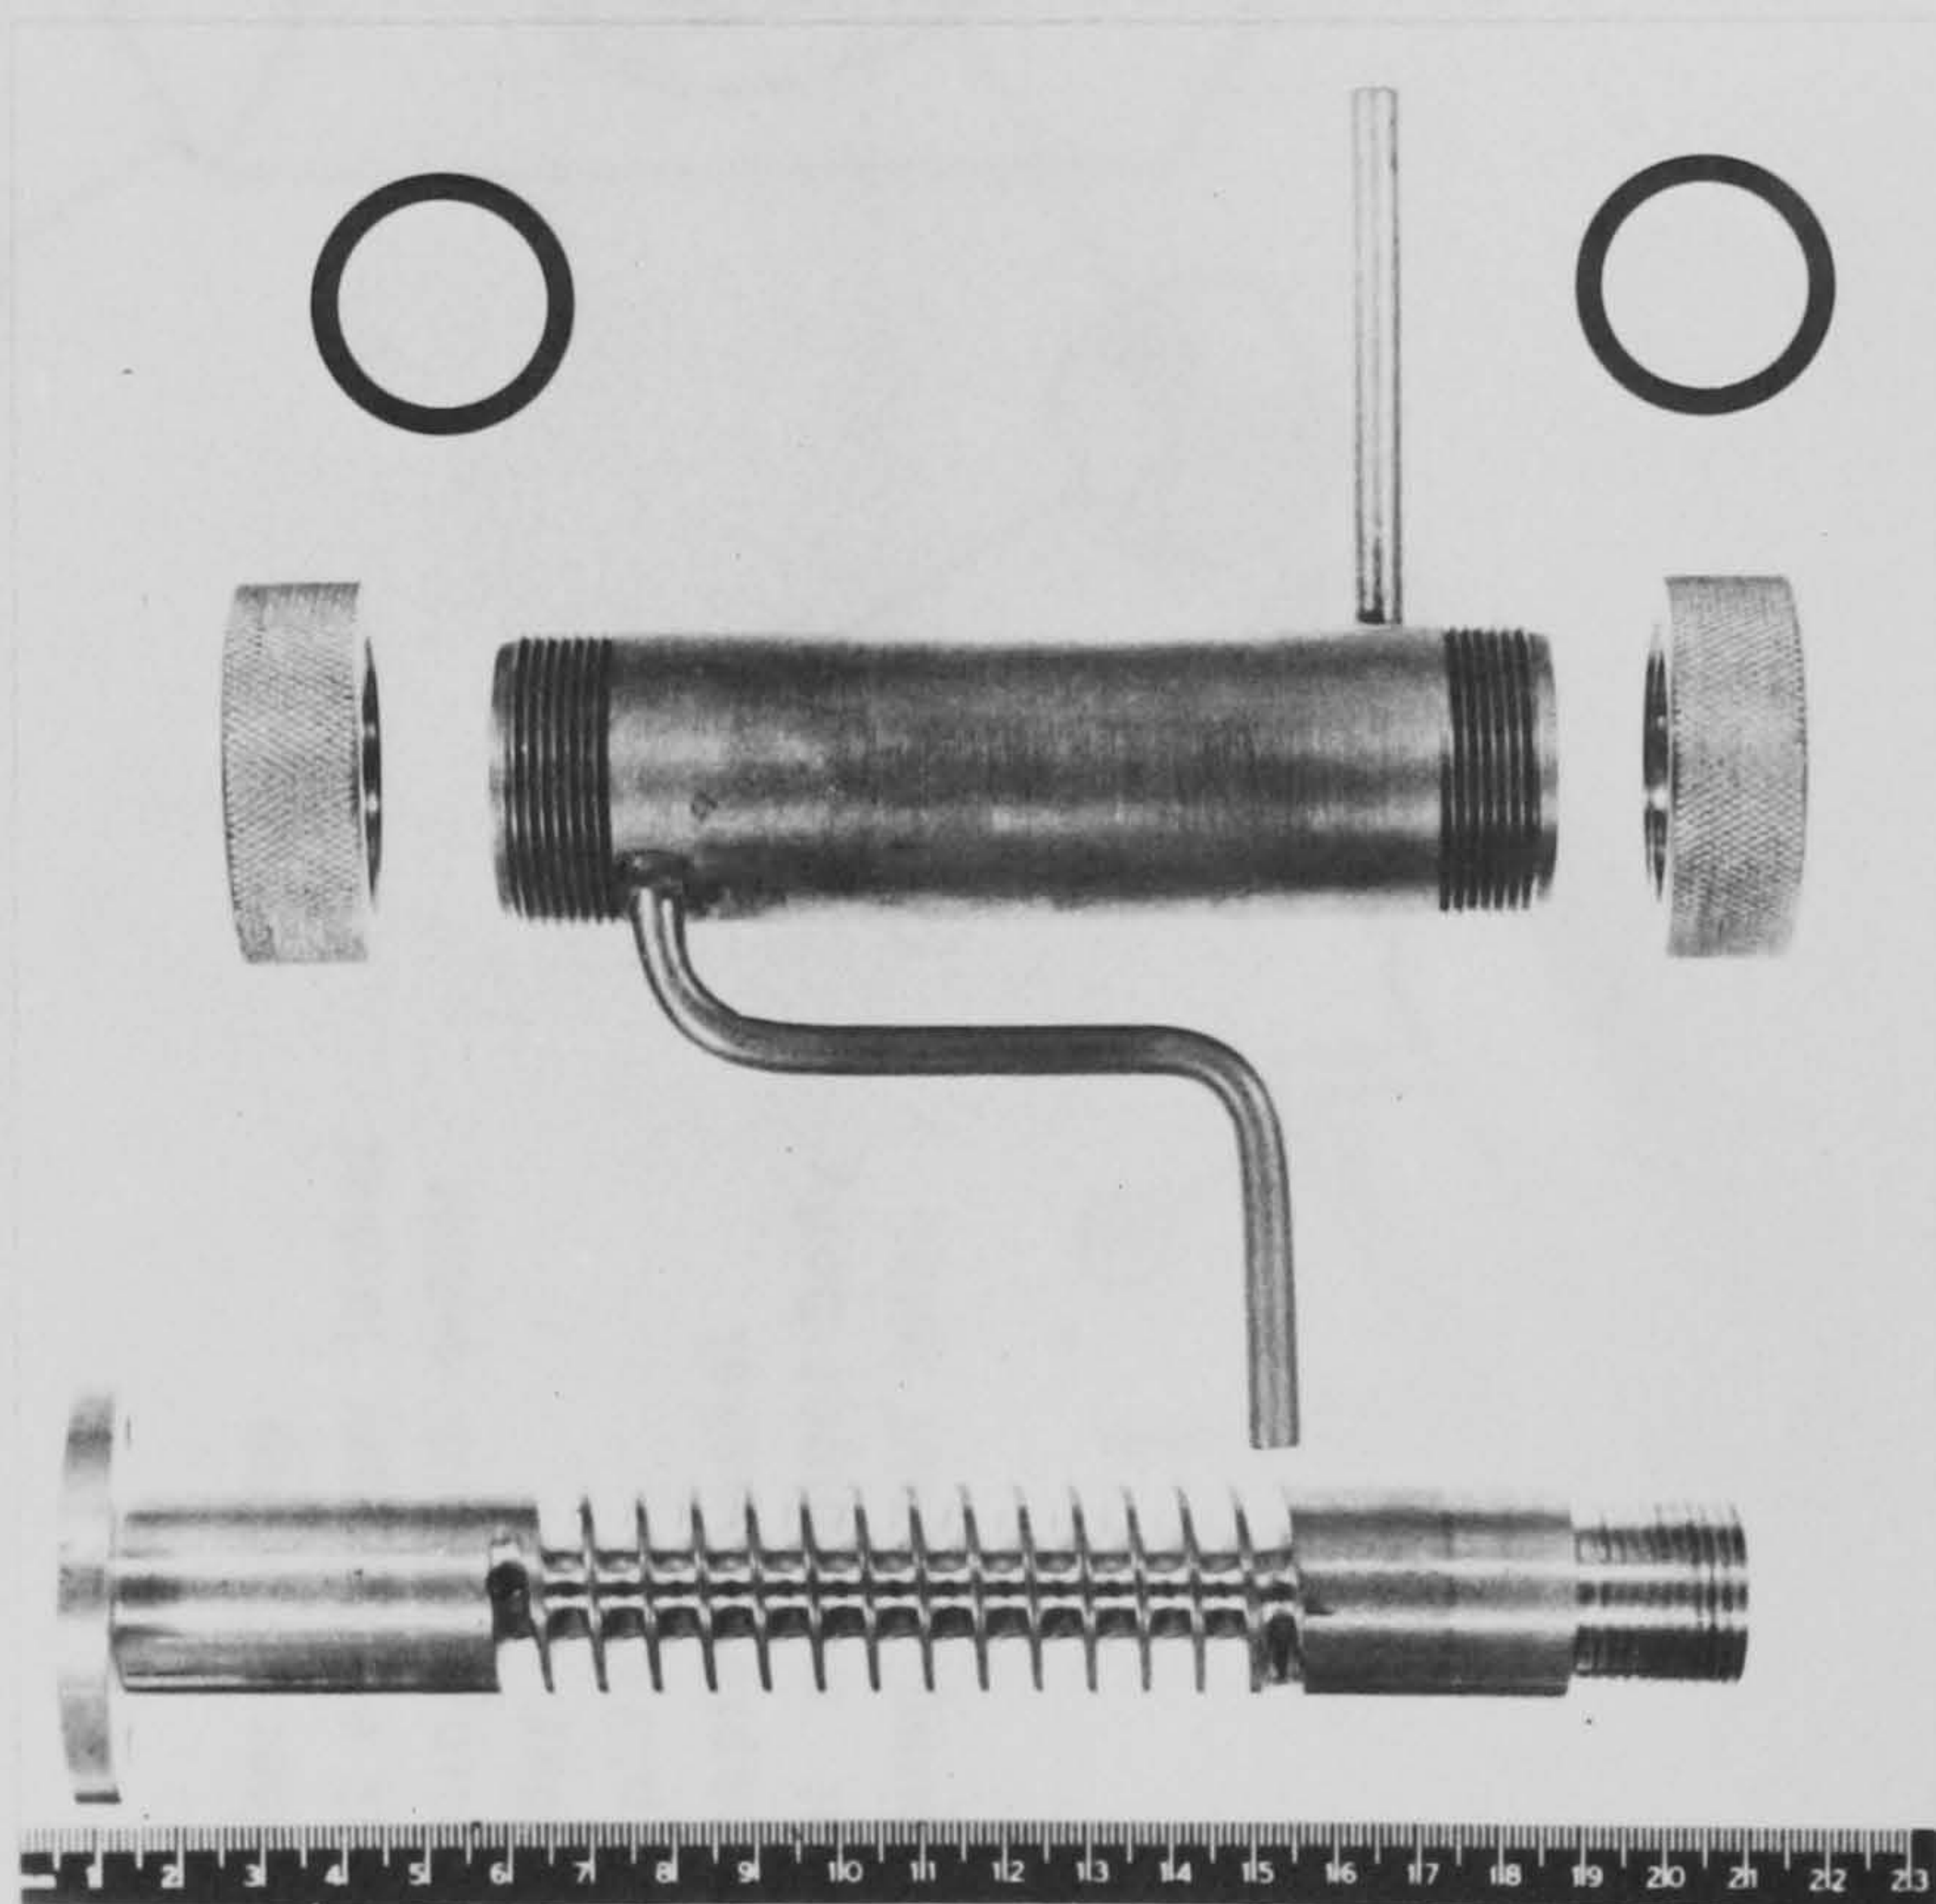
'IMPROVED HEAT EXCHANGER' PARTS
